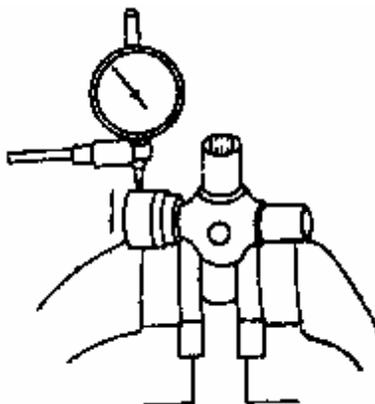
Check Cross Shaft Bearing Clearance
